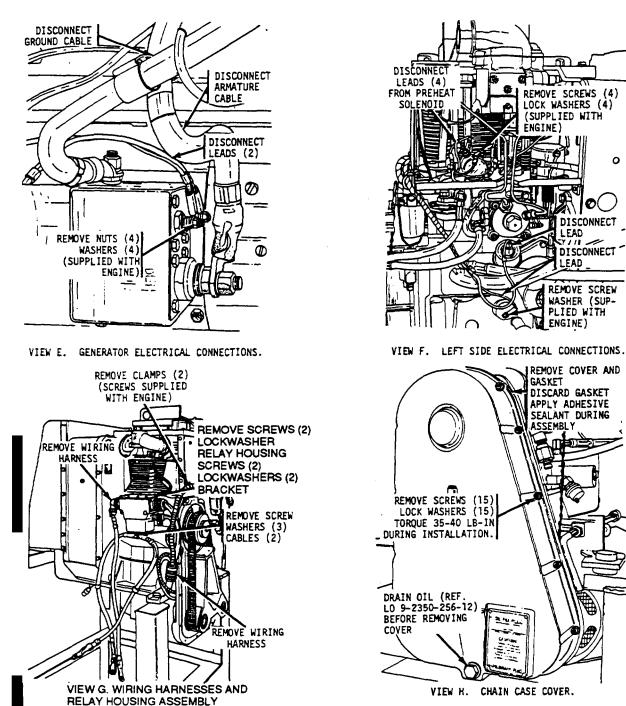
Auxiliary power unit-disassembly and assembly (Sheet 1 of 6).
